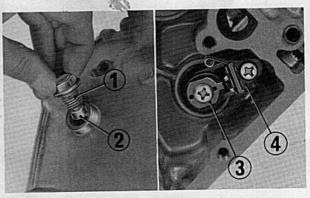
(1) Shift drum guide screw (2) Shift drum guide collar (3) Neutral switch rotor
